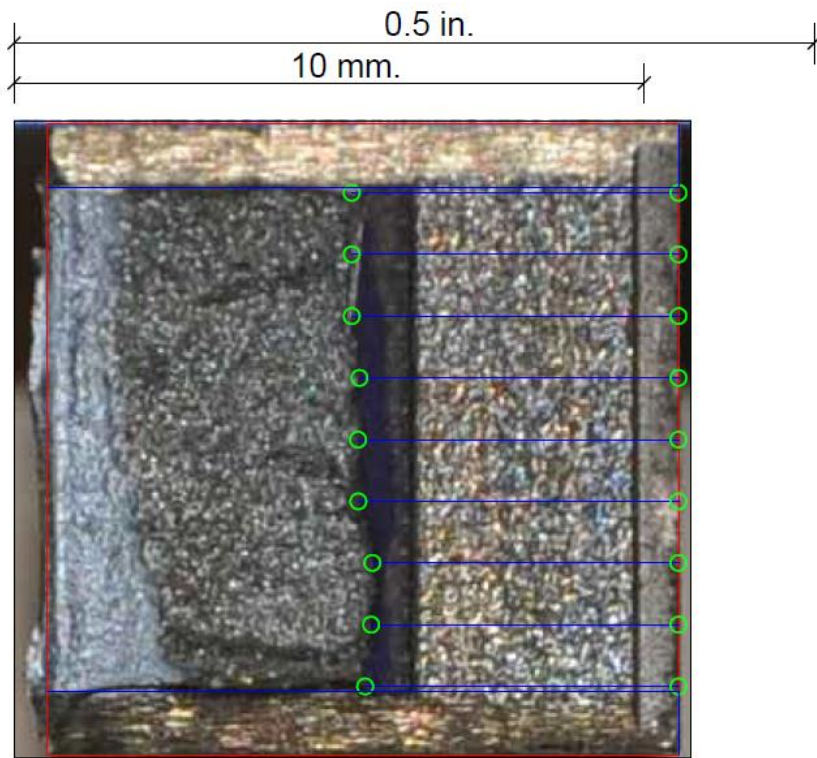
Specimen H22' Fracture Surface
